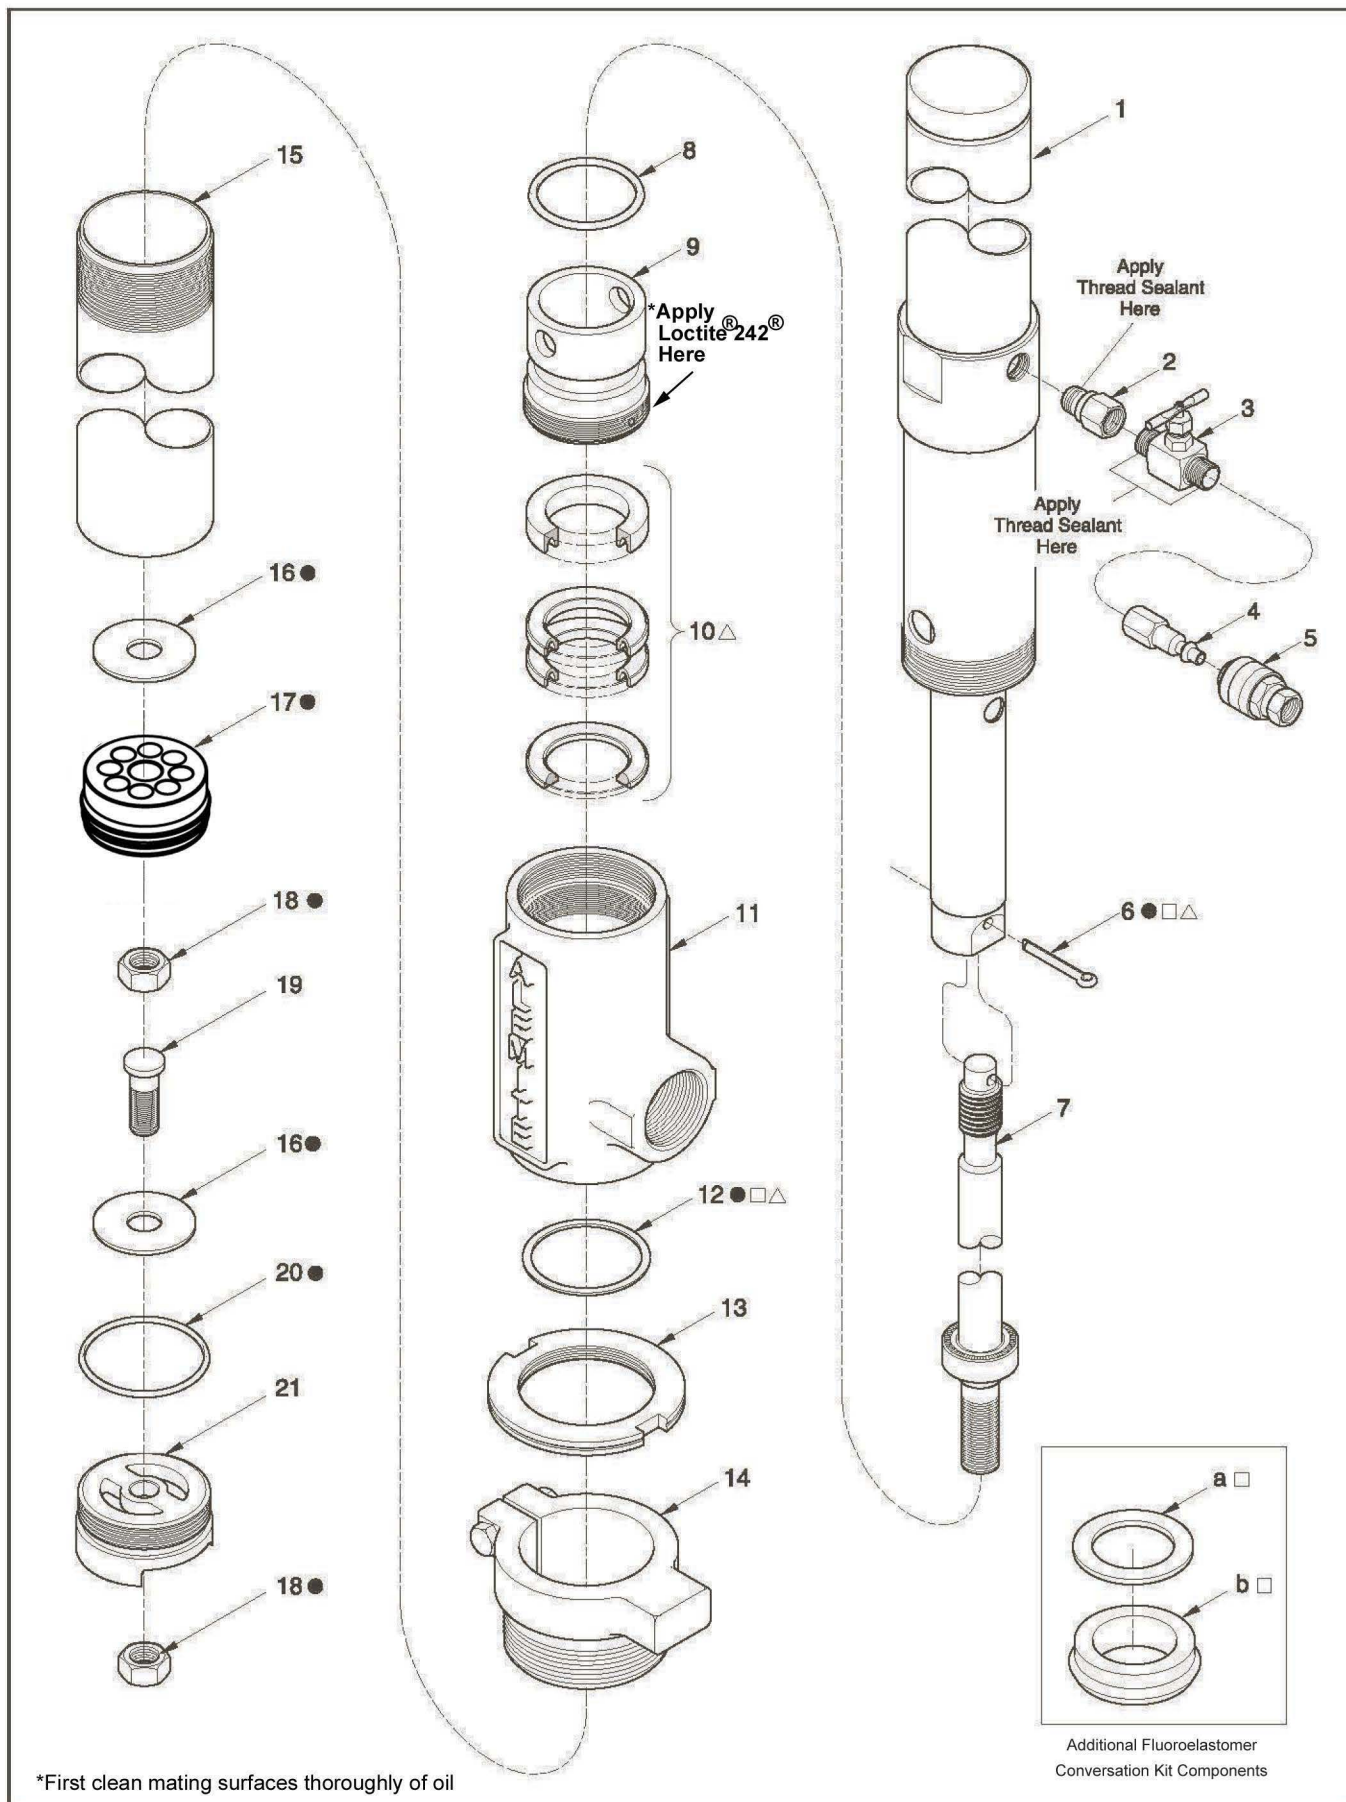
Transfer Pump Model 7216-4 - Exploded View
